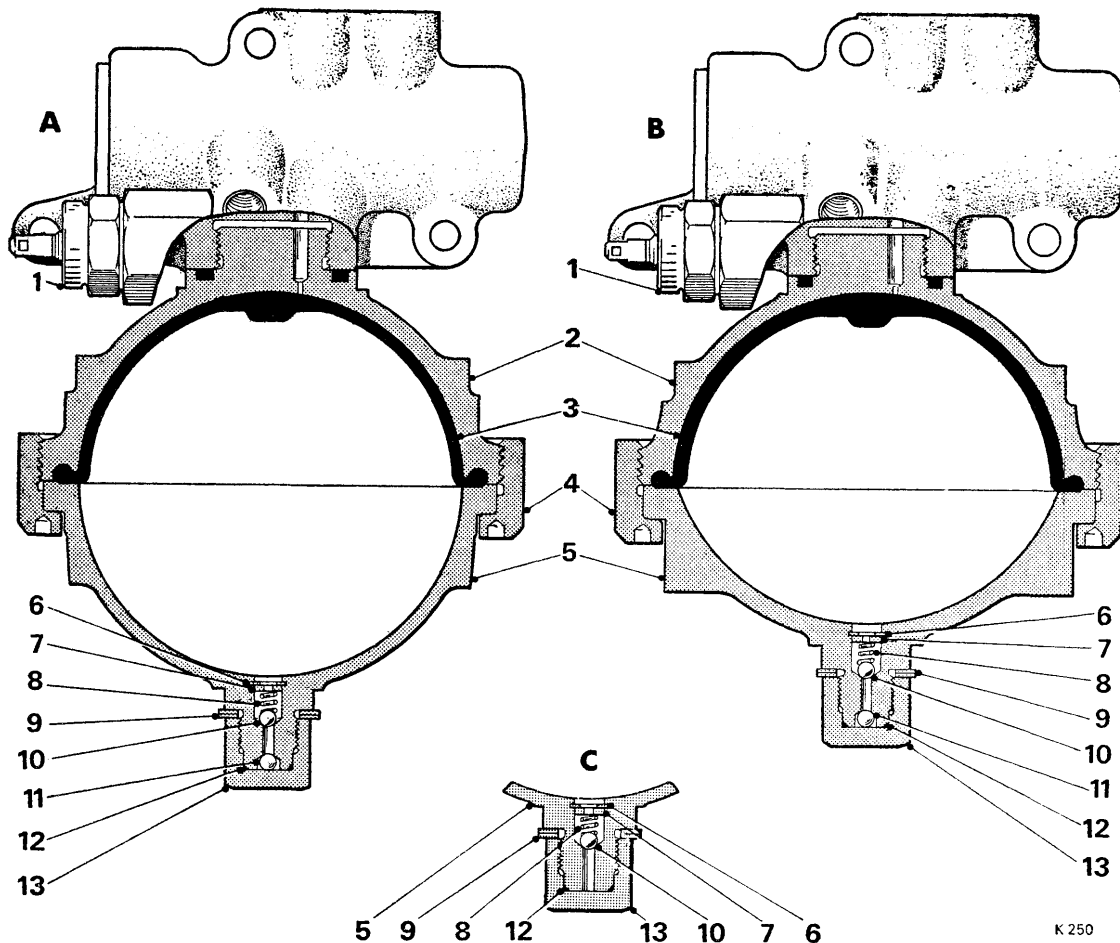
SECTIONAL VIEW—HYDRAULIC ACCUMULATORS
